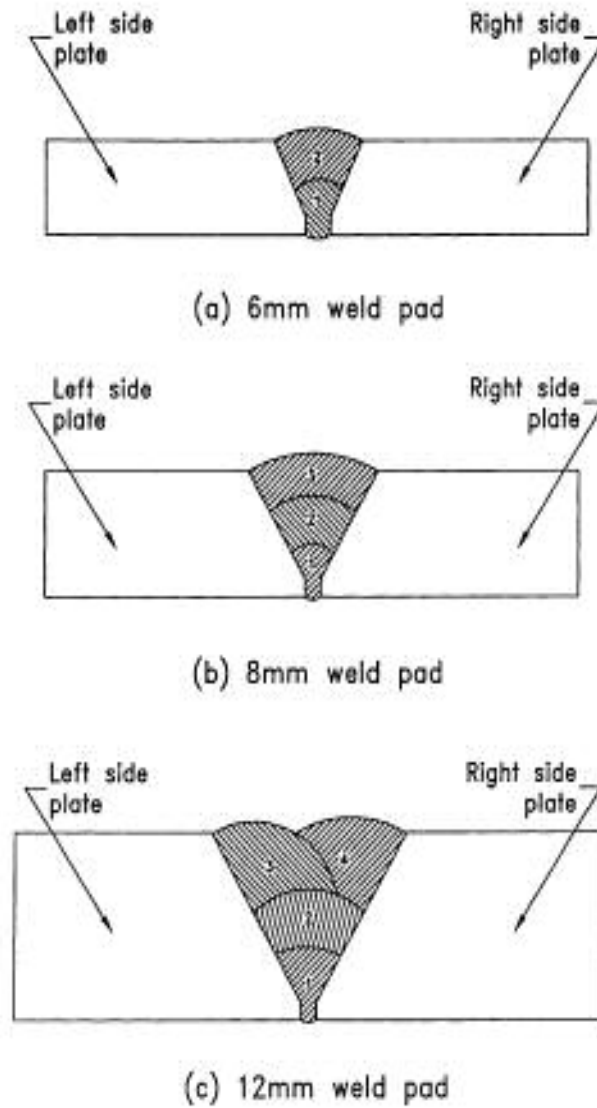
Multiple welding passes in weld sequences involving 6, 8, and 12 mm weld pad V-grooves [12]
